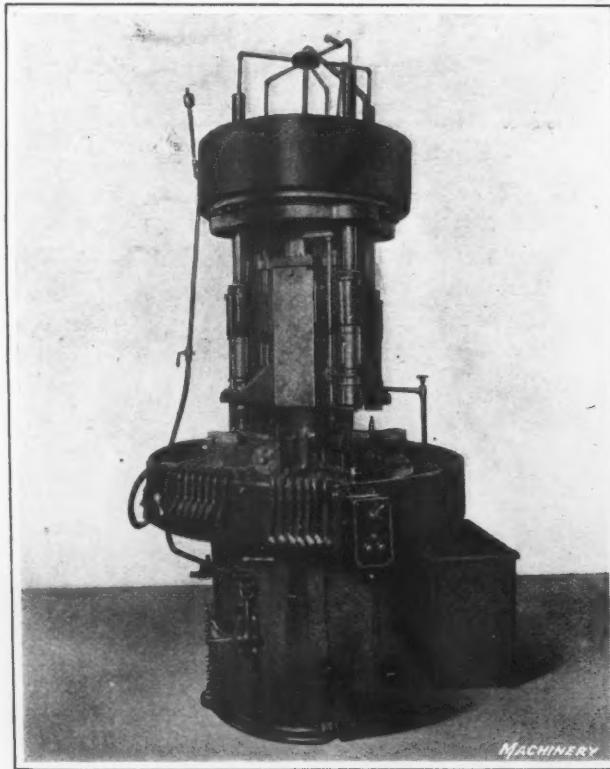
Daniels Vertical Automatic Chucking Machine built by the McDonough Mfg. Co. and equipped for machining Two Types of Steering Arms
